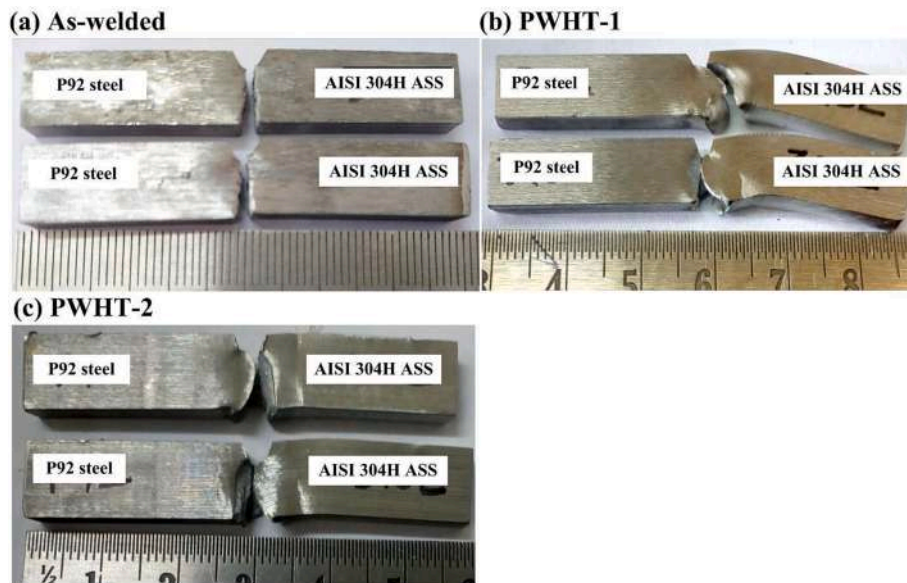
The photographs of dissimilar P92 steel-AISI 304H ASS A-TIG weld joint impact toughness test samples.
